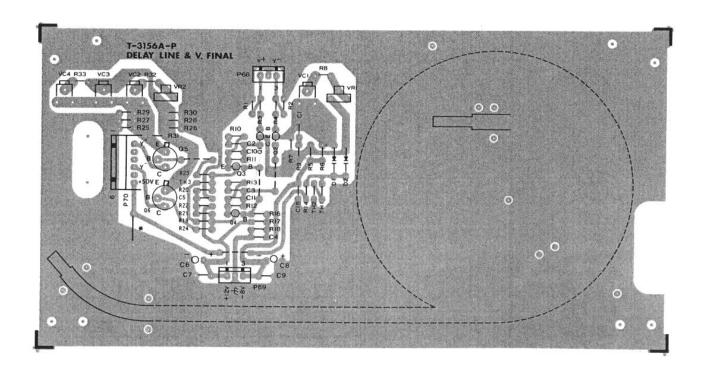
LBO-516 Delay Line and Vertical Final Drive P.C. Board T-3156A
